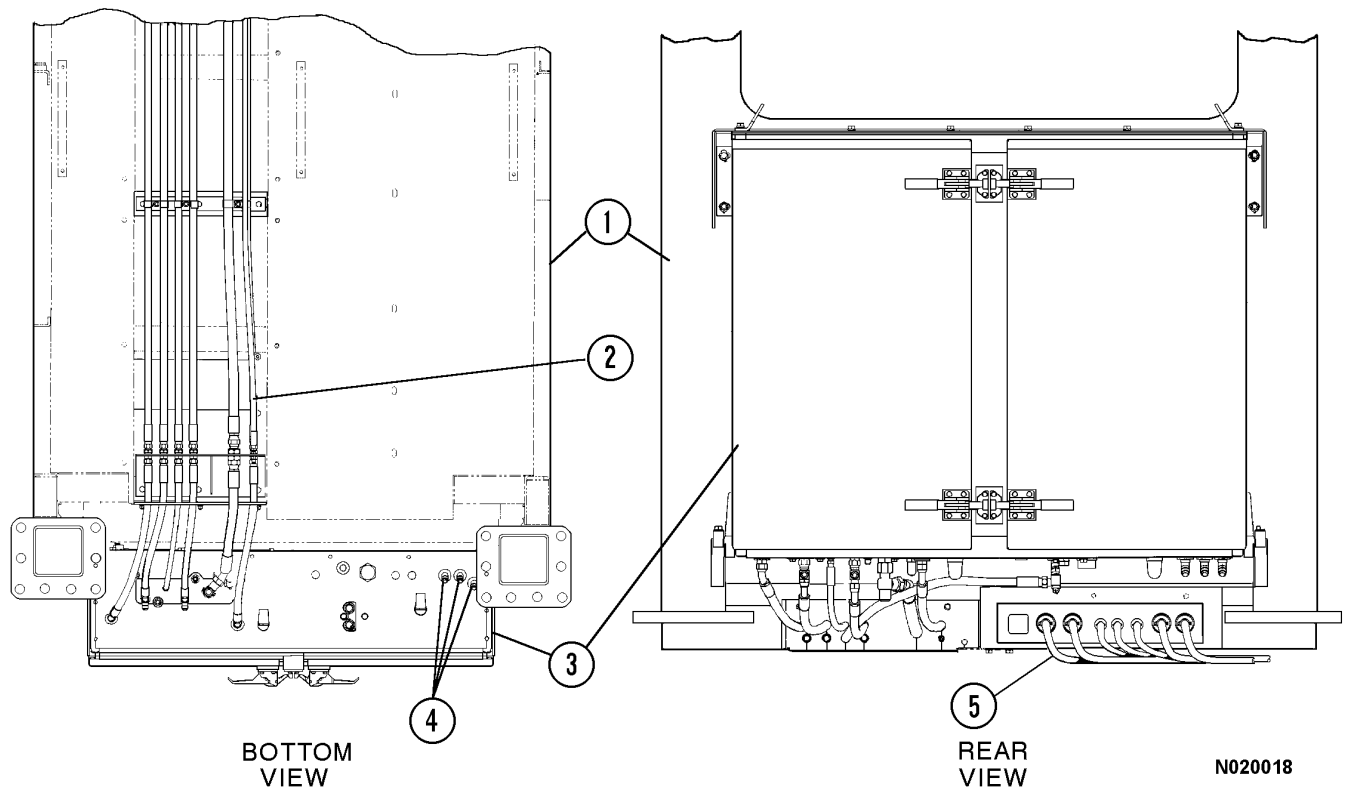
CAB HYDRAULIC AND ELECTRICAL CONNECTIONS
